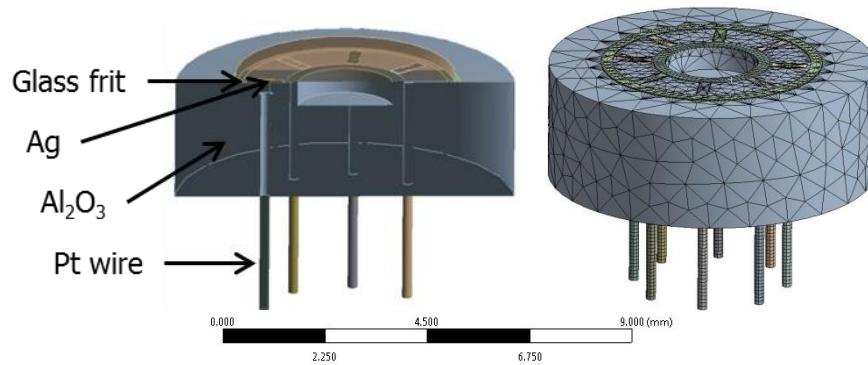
Packaging structure - 3D image of whole and cross-section isometric view
